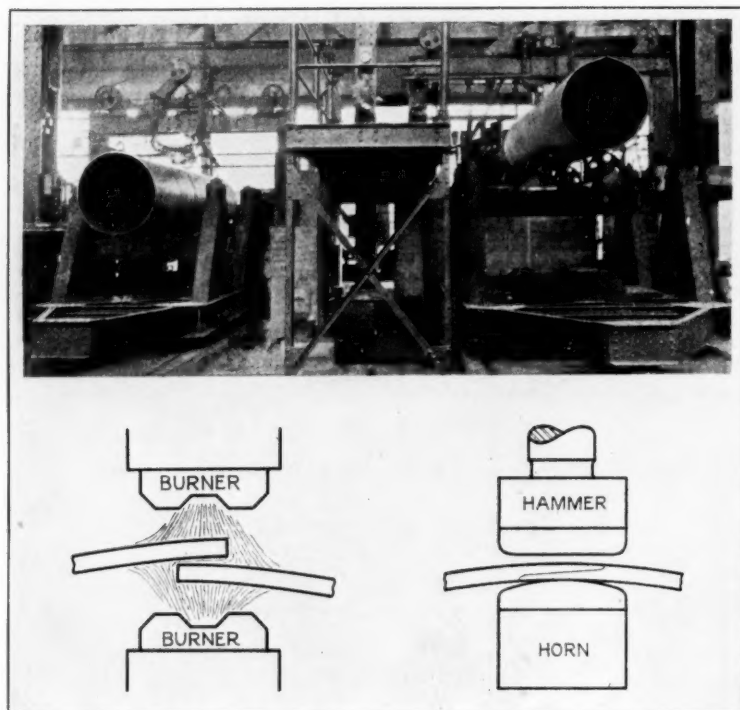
MAKING HAMMER-WELD PIPE
